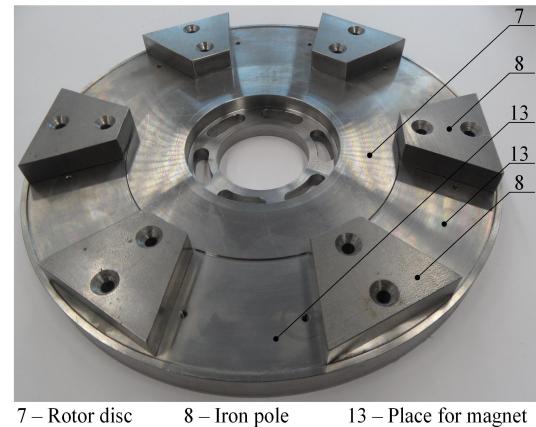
Rotor's disc of the FCAFPM machine with iron poles
